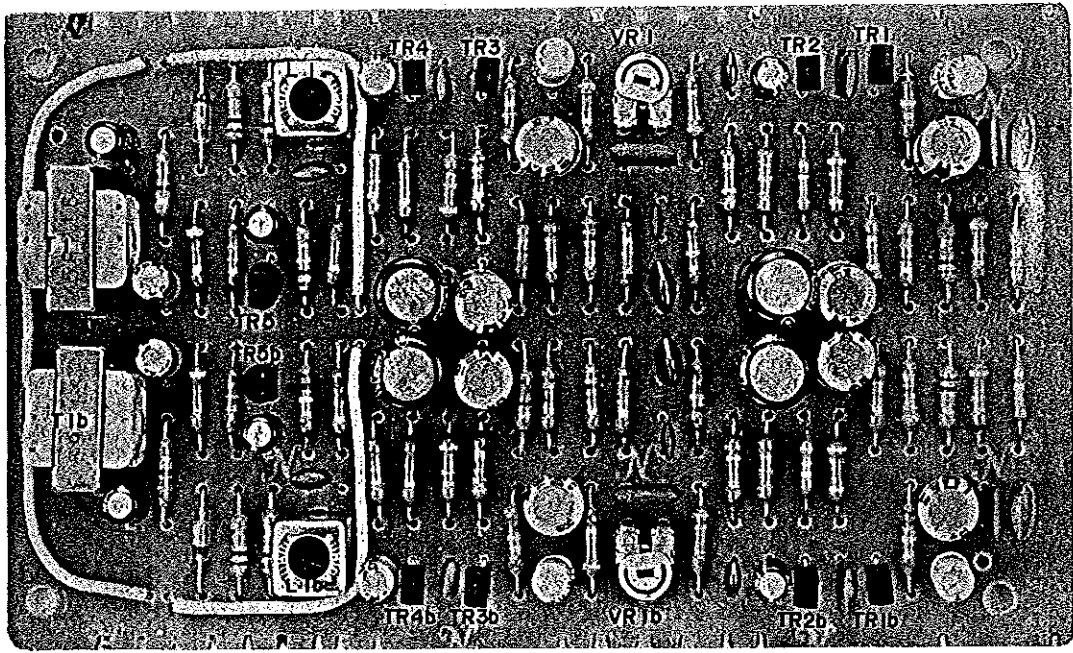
PB. AMP. P.C. BOARD TD-5004 (Front Side)
